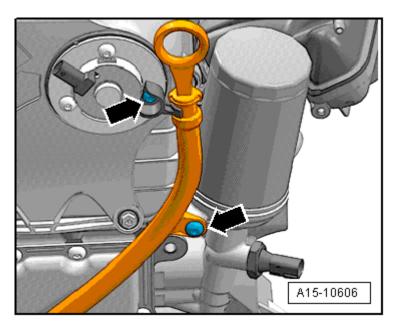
Identifying Oil Dipstick Guide Tube And Bolts
